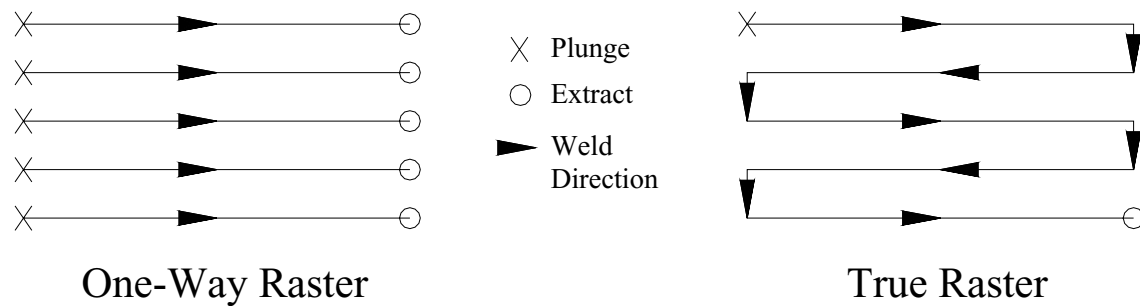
Weld patterns used for FSW of fuel plates.
